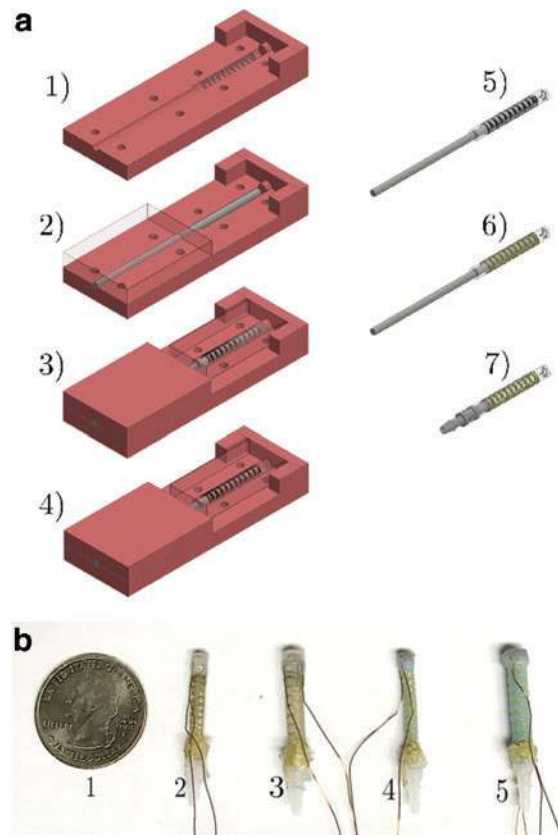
(a) Fabrication process of fiber-reinforced functional catheter tip: 1) prepare *bottom* core mold and front cap section with extruded cylinder, 2) place steel rod used to make inner diameter of catheter, 3) fill mold with uncured material, then place on *top* mold section, 4) replace front cap with cap containing negative of microchannel, 5) remove cured core from mold and fill microchannel with eGaIn, 6) wind Kevlar thread in double helix around core, 7) replace rod with inlet connector to seal section and add wires to the sensor. (b) From *left to right*: 1) U.S. quarter dollar coin, 2) prototype with Dragon Skin 30, $E_a = 0.614$ MPa, with external radius of $B = 1.3$ mm, 3) prototype with Dragon Skin 30, $E_a = 0.614$ MPa, with external radius of $B = 1.8$ mm, 4) prototype with Smooth-Sil 935, $E_a = 1.173$ MPa, with external radius of $B = 1.3$ mm, 5) prototype with Smooth-Sil 935, $E_a = 1.173$ MPa, with external radius of $B = 1.8$ mm. (E_a is 100% tensile modulus reported in material data sheet.) eGaIn, eutectic gallium–indium. Color images are available online.
